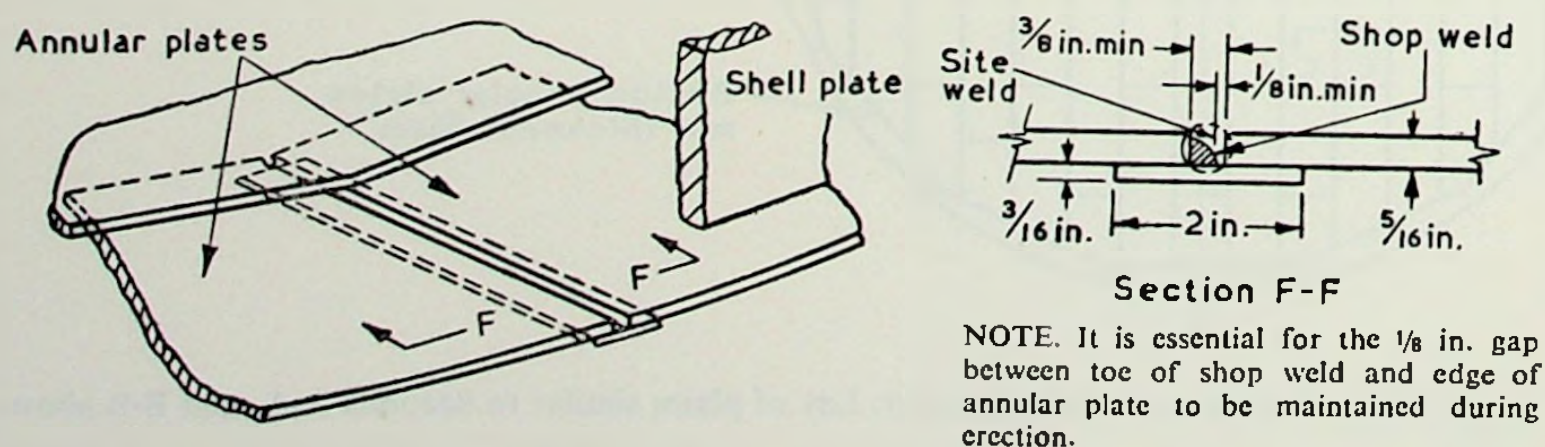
Joint in annular plates under shell plates. Tanks over 40 ft diameter
